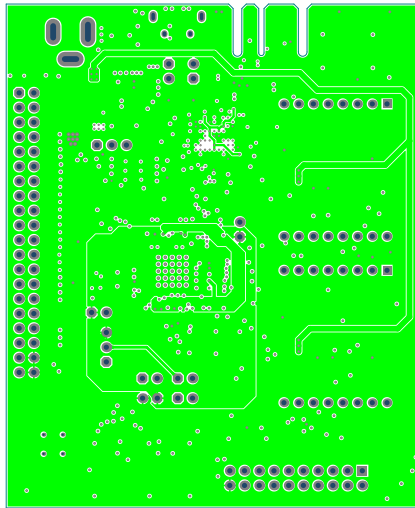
PIC32CXMTG-EK Layout: Bottom Layer
